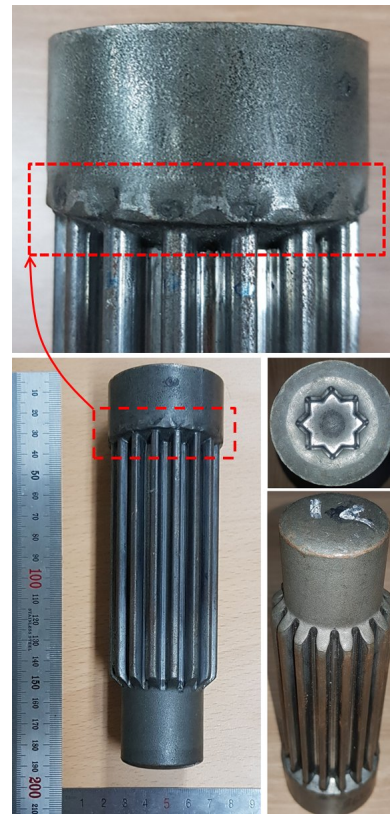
Preliminary fabricated drive shaft with cold forging defects.
